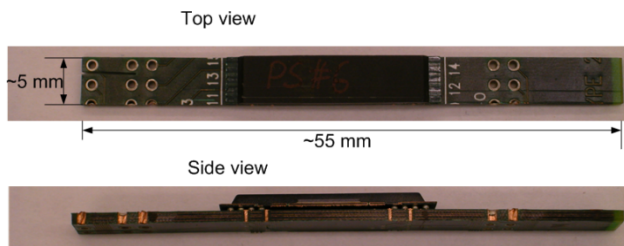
A typical specimen obtained from a PBGA256 package of 27mm x 27mm size with a pitch of 1.27mm. The solder ball is made of SAC405 lead free alloy.
